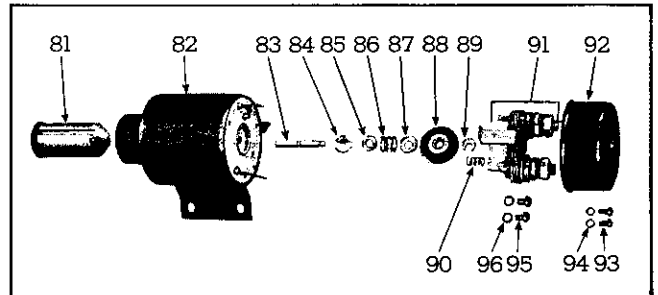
Solenoid Switch Details and Relative Location of Parts.
